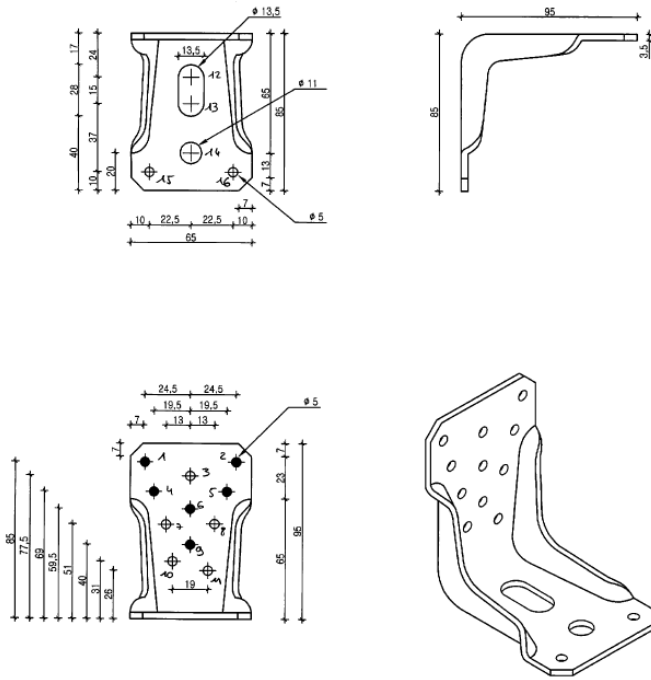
Dimensions of an angle bracket with bolt hole 65x95x85x3,5
